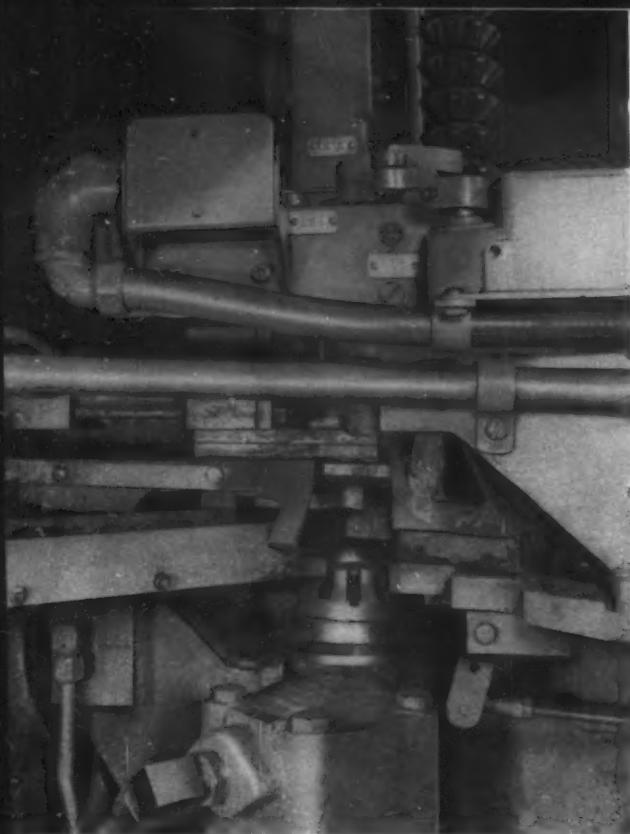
Close-up view of grinding area on spherical-seat generating machine. An in-process air gage automatically controls work size and adjusts for wheel wear.
